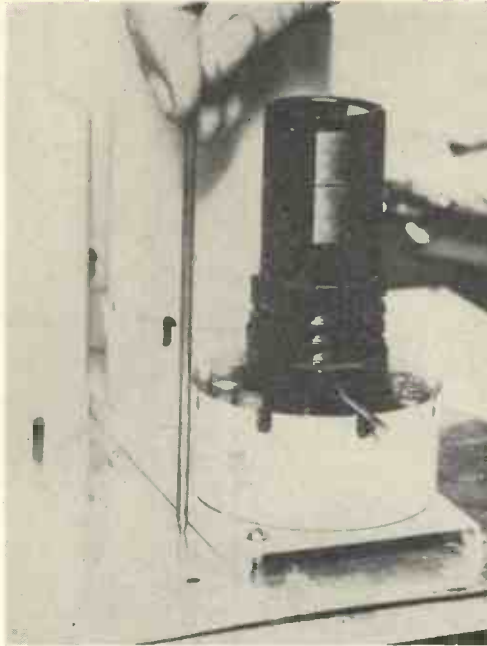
MARKING OFF THE POSITION OF A HOLE TO CARRY A WIRE FROM A TUNING COIL TO A COMPONENT BELOW THE BASEBOARD.
